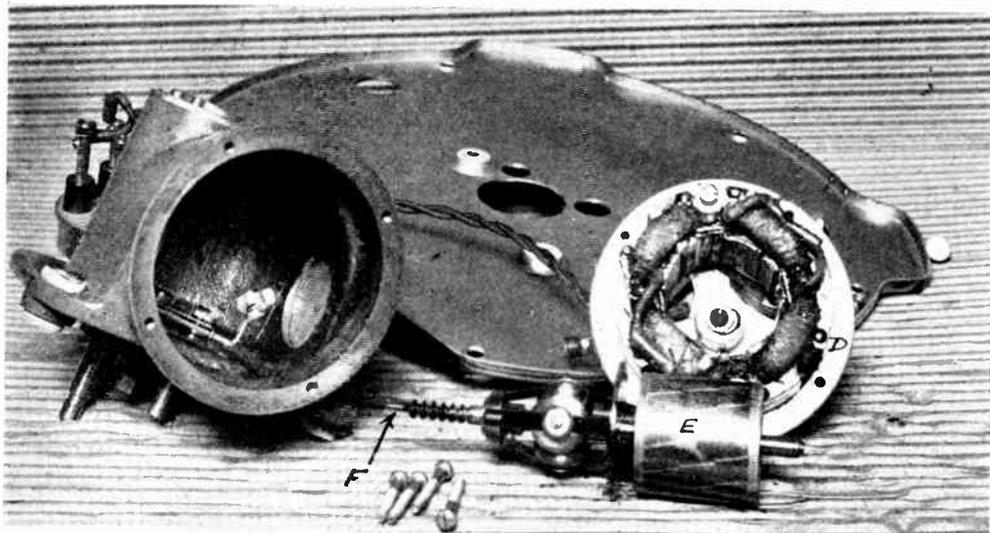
ROTOR AND STATOR WINDINGS OF GARRARD MOTOR TYPE 202.
